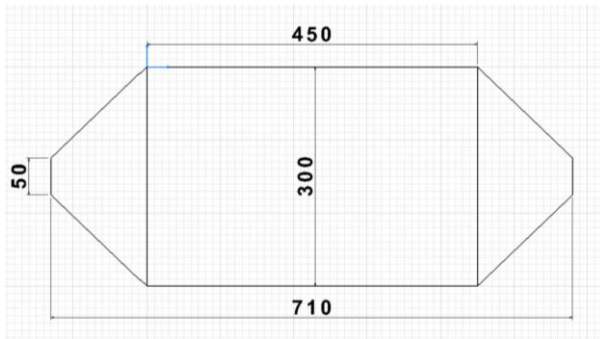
Technical drawing of TEM Cell – top view (top and bottom plate dimensions)
